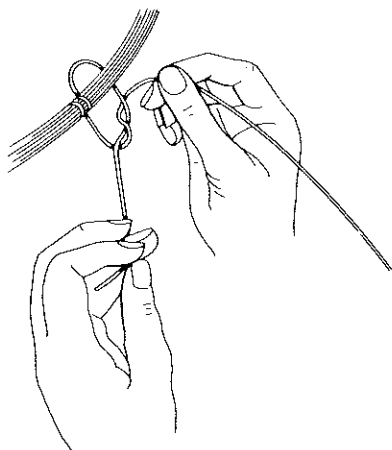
A. Step-by-Step Tying First Part of Collins Standard Knot
